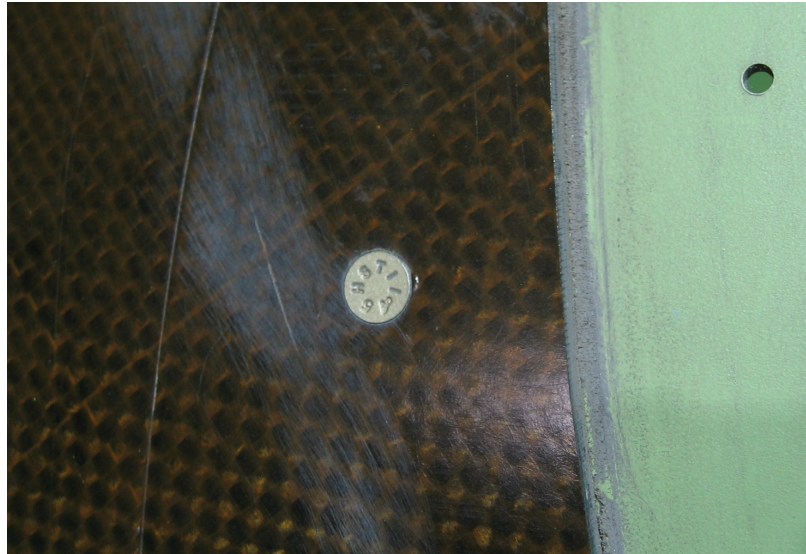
Exterior view of a titanium HI-LITE™ fastener used to mechanically fasten a CFRP laminate to an aluminium part. Note that the flush head of the fastener is visible in this photograph.
